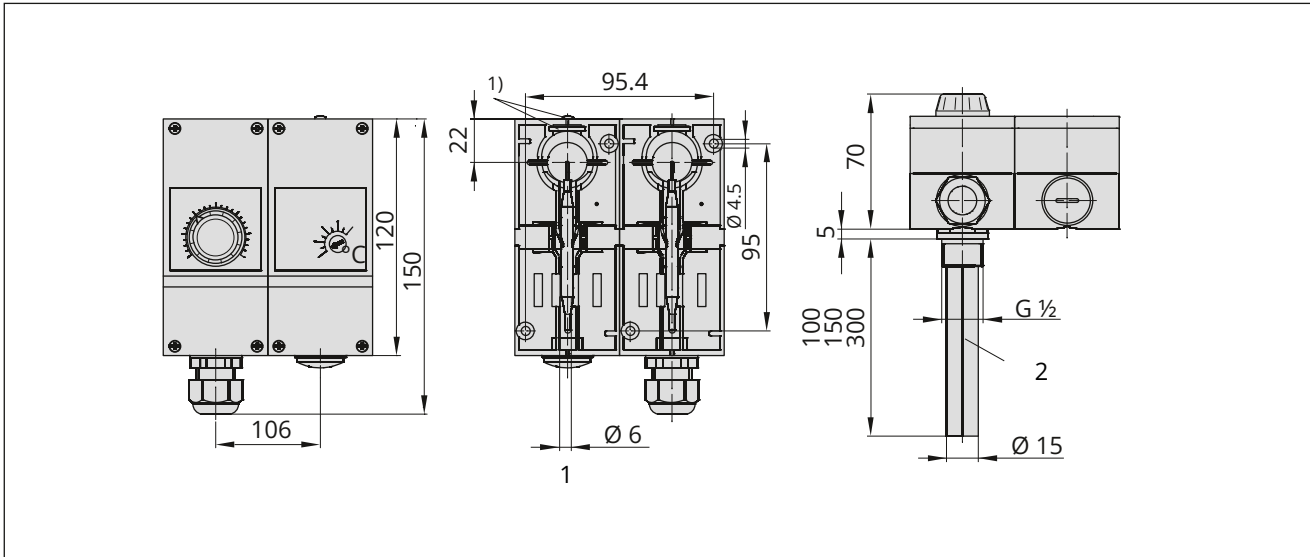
Dimensions in mm · Type 5348 Double Thermostat TR/STM
